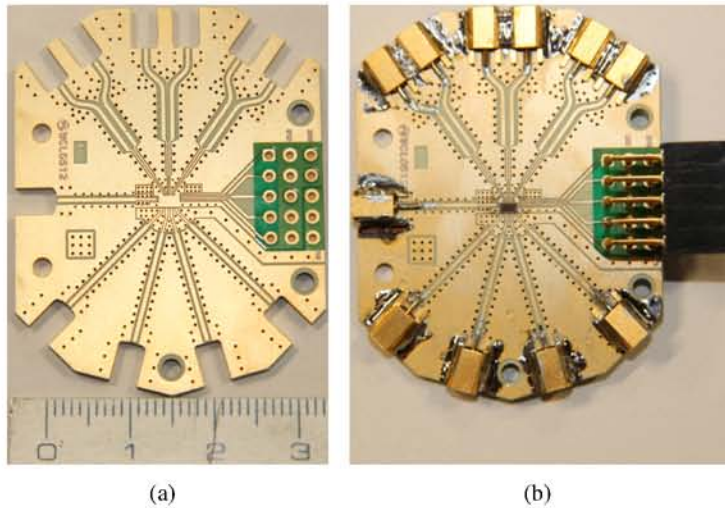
2-channel EAM driver array test board: (a) before assembly and (b) after assembly
